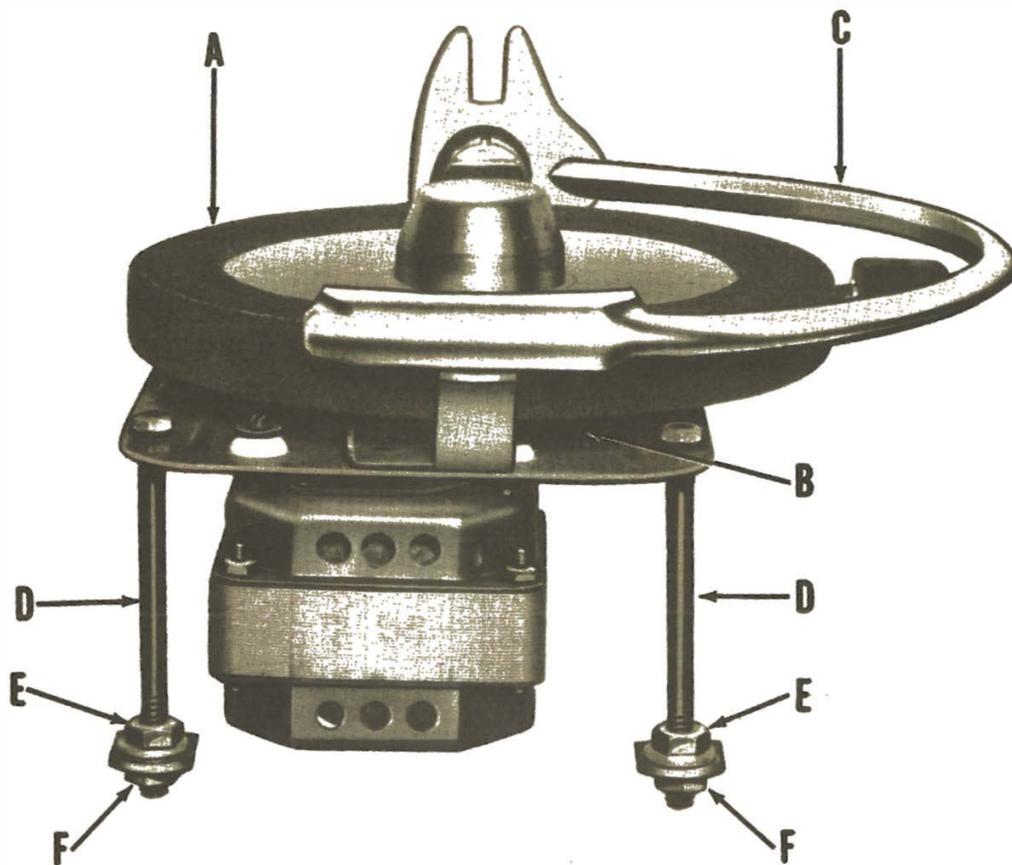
TURNTABLE AND ASSOCIATED PARTS
